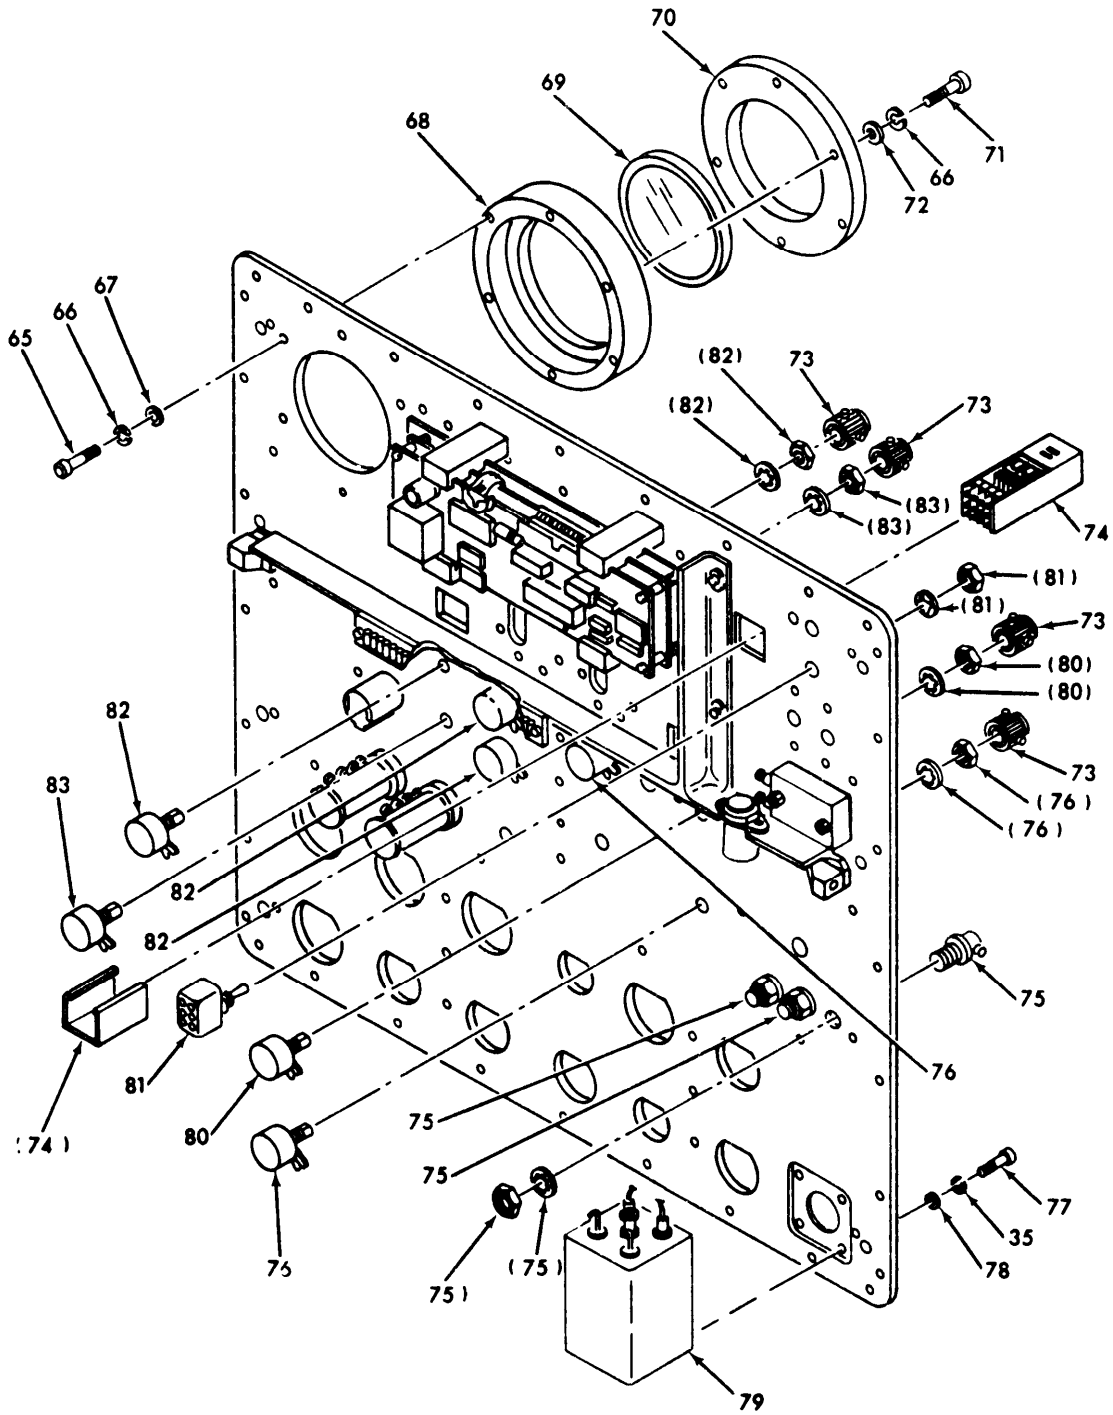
PANEL ASSEMBLY AI COMPONENT PARTS
